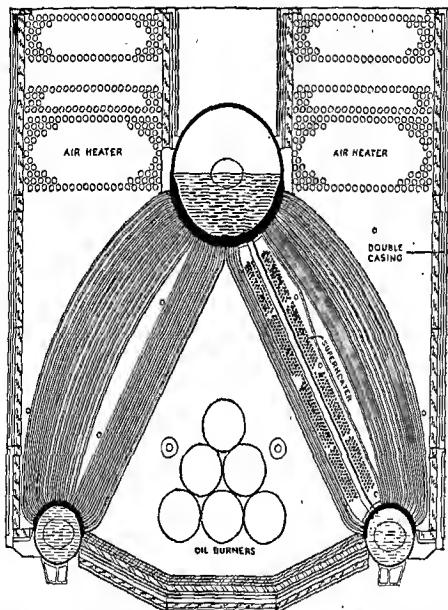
Babcock and Wilcox express type three-drum bent-tube boiler with superheater and air heaters.
